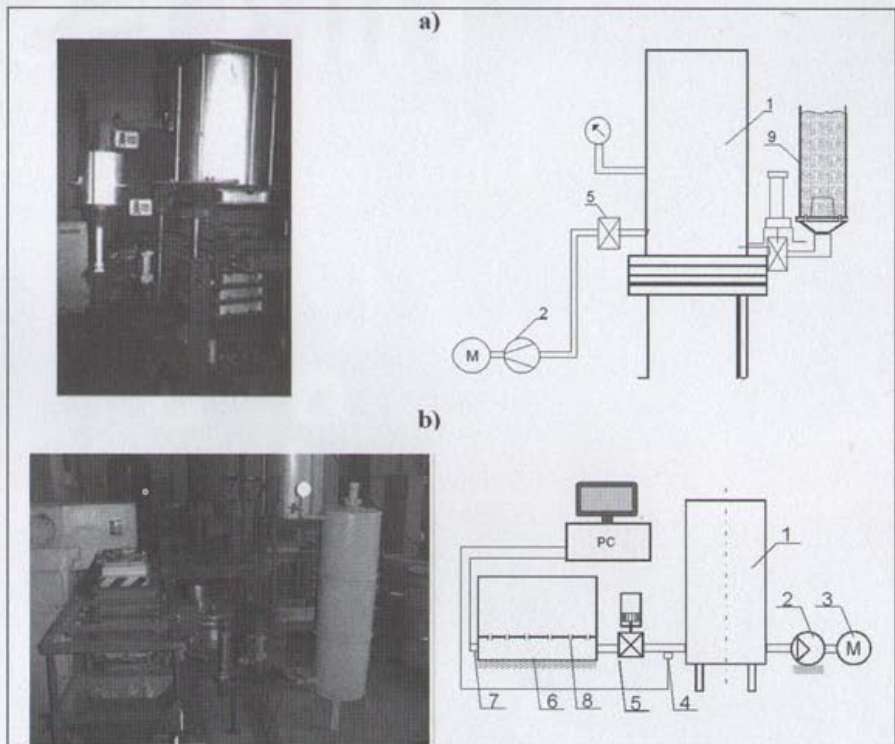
Schemes of investigation stands: a) stand for model research, b) view and scheme of stand for vacuum assisted moulding based on the jolt-squeezing machine FKT 54 type; 1 – vacuum receiver, 2, 3 – vacuum pump with drive, 4 and 7 – pressure gauges, 5 – valve, 6 – moulding flask with frame, 8 – vents, 9 – moulding chamber
